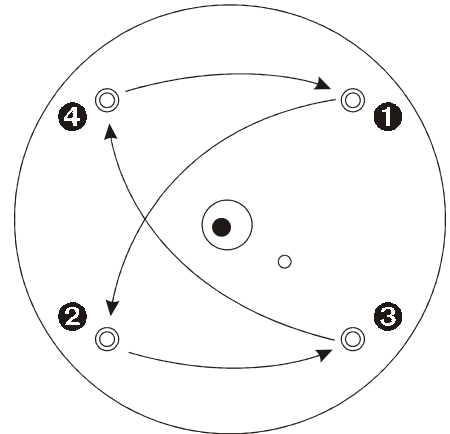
Pattern for tightening the socket-head cap screws on the sample chamber
